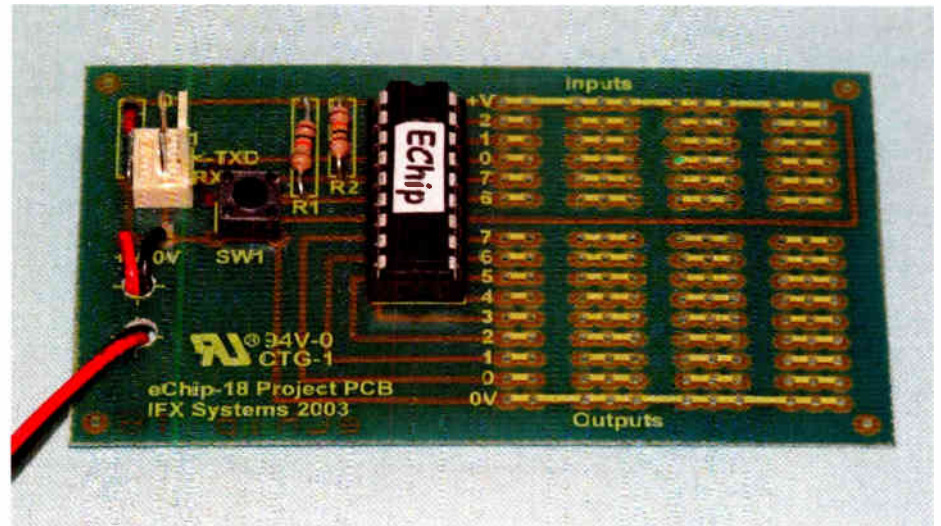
The PIC printed circuit board has a prototyping area and requires a separate voltage supply
